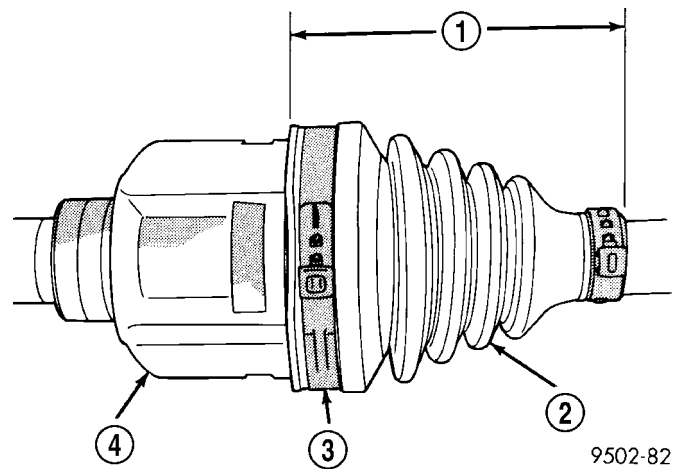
Sealing Boot End to End Length with Hytrel Boot
